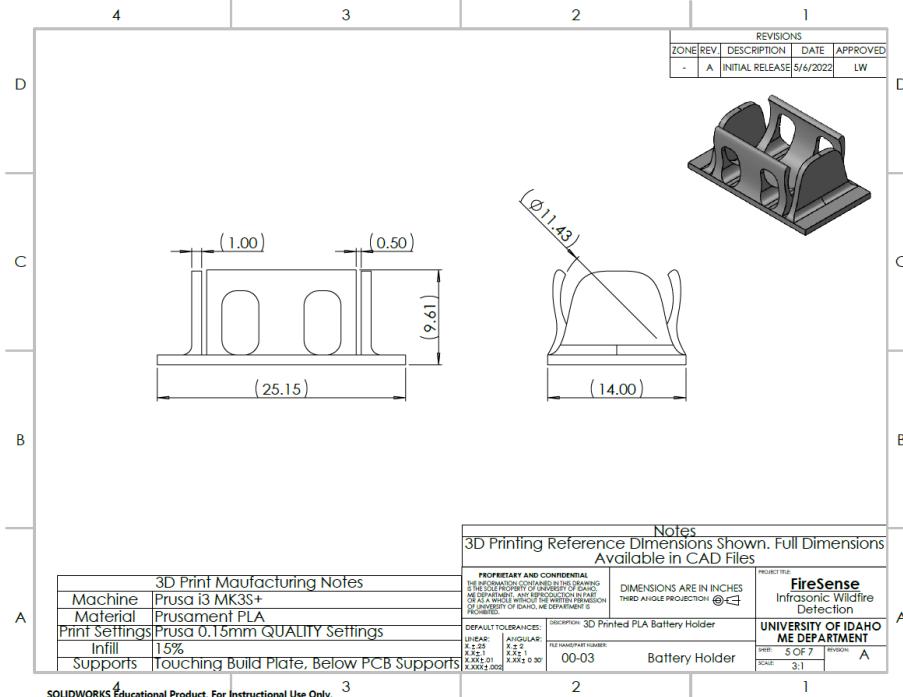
Technical Drawing Package Sheet 5, Battery Holder
